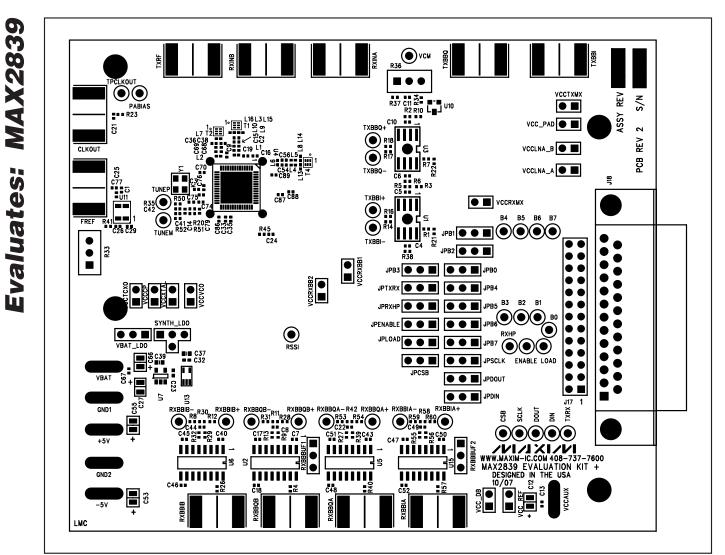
MAX2839 EV Kit PCB Layout—Top Silkscreen
